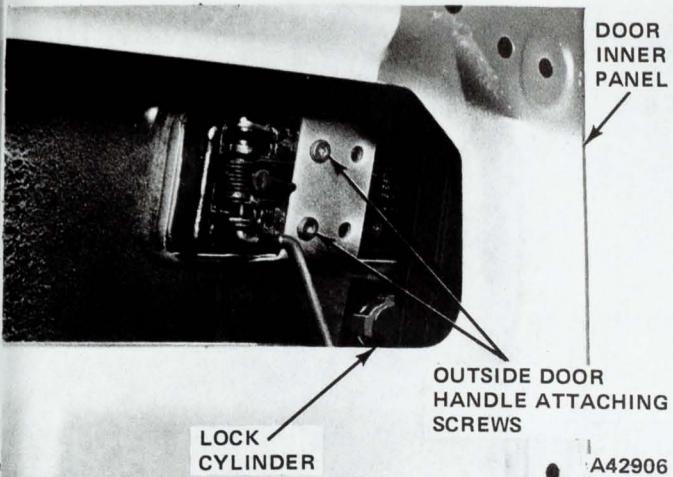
J-27 Outside Door Handle Replacement—Gremlin-Concord-AMX
